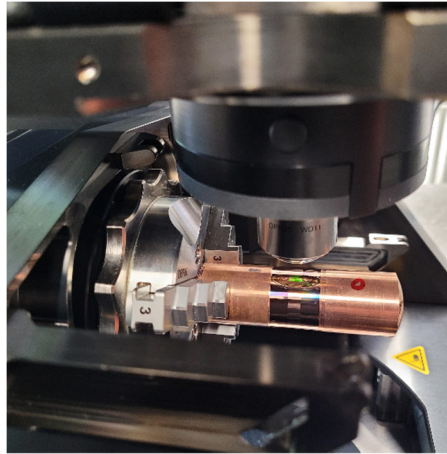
Measurement of the copper prototype specimen with the optical coordinate measuring machine Alicona μ CMM
